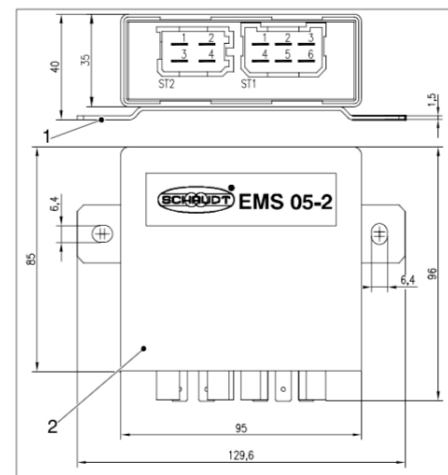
EMS 05-2 step controller (dimensions in mm)
